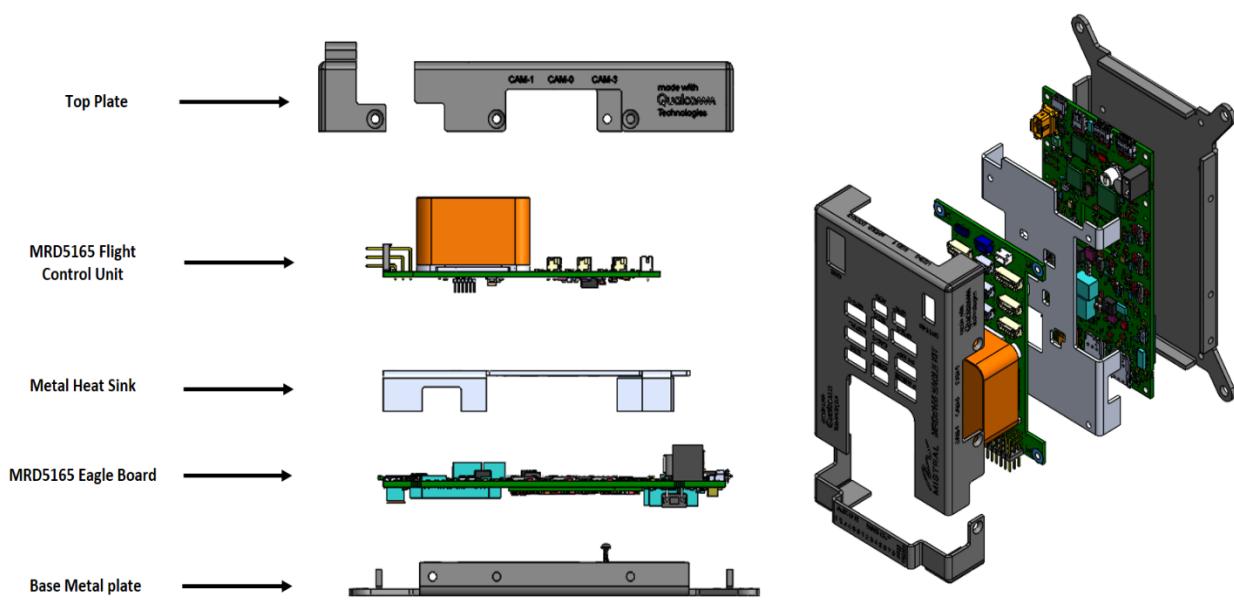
MRD5165 Eagle Kit - Exploded view
